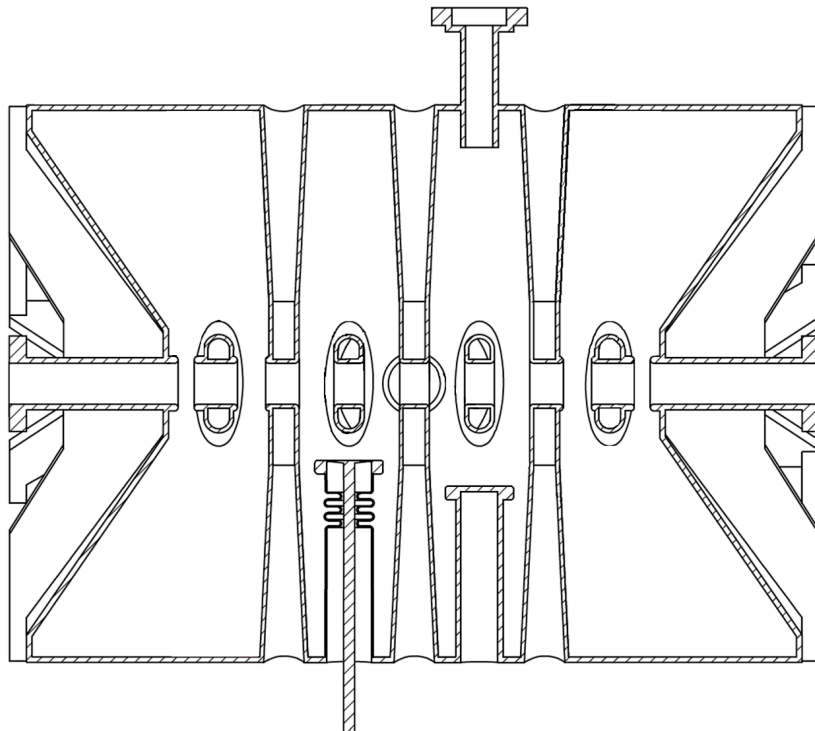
Technical drawing of the superconducting cavities CH1/CH2 [1].
